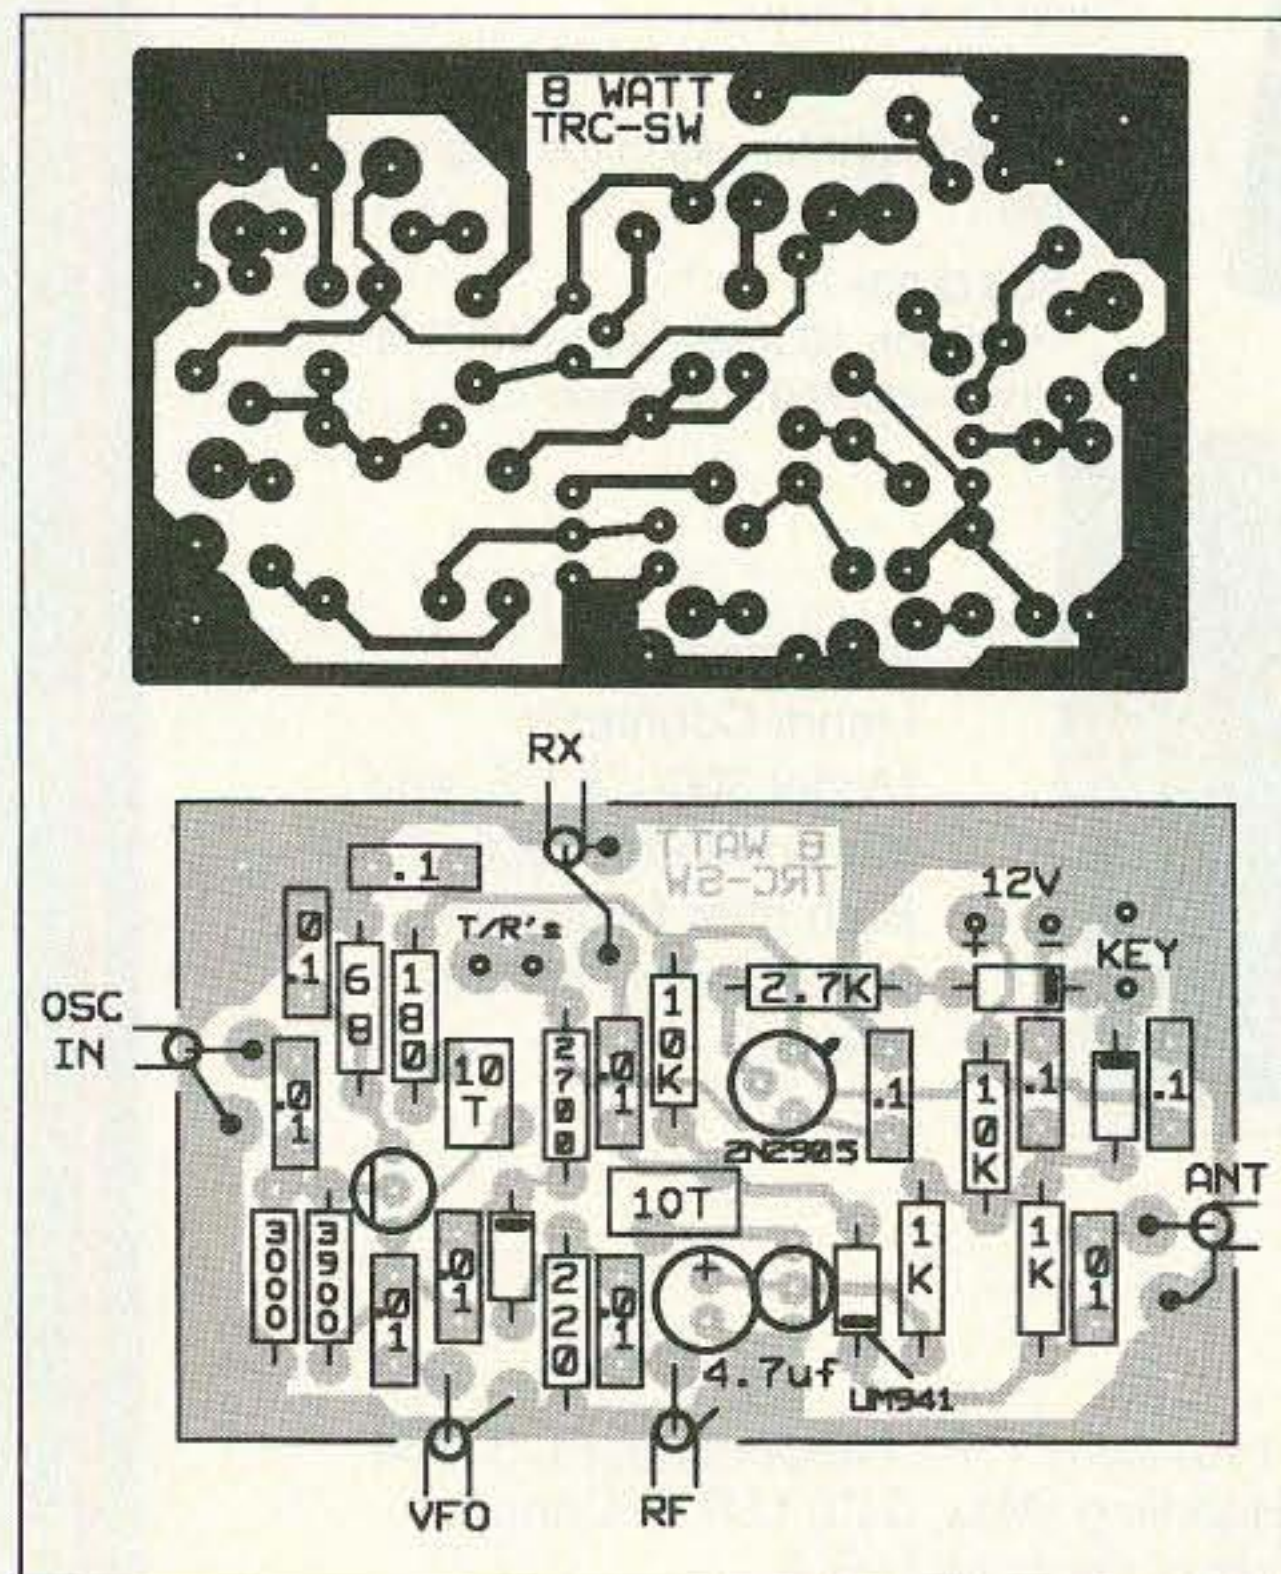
a. PC board foil pattern for the switching board. b. Parts placement.
